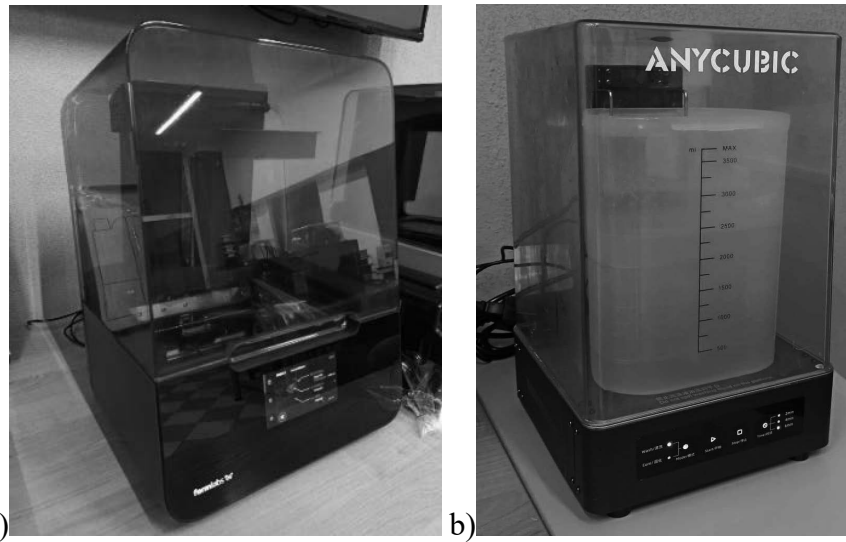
Devices used to print finger elements: a) FormLabs printer; b) print cleaning unit.
